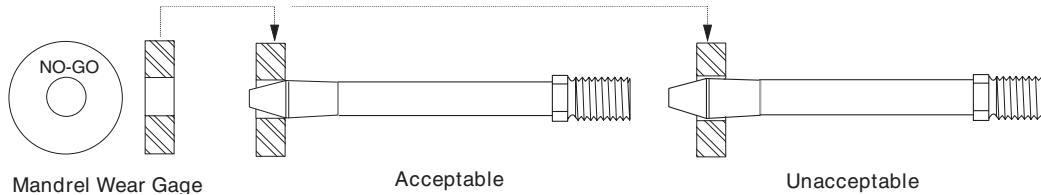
Checking a Mandrel with the Mandrel Wear Gage
